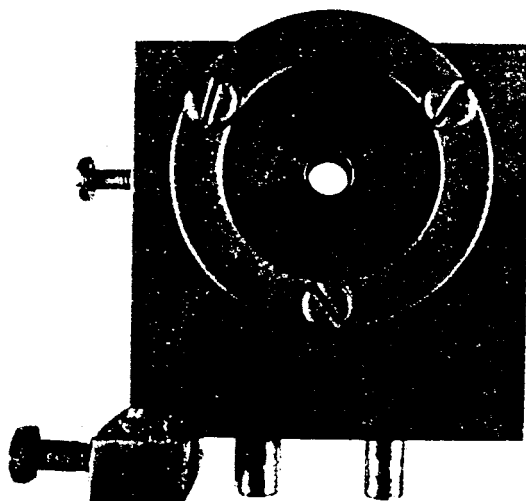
Clamping jig for disc-shaped LVDT Arc Height specimens.
